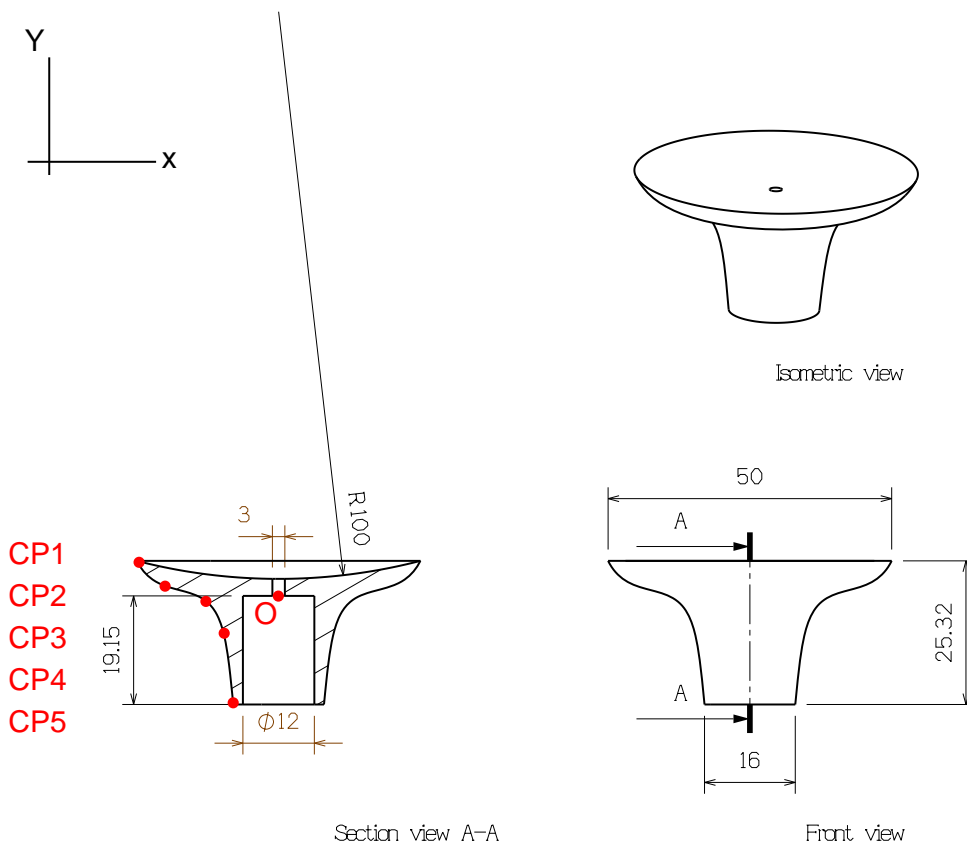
Technical drawings of the ball-sting interface bowl. Scale 1:1.
